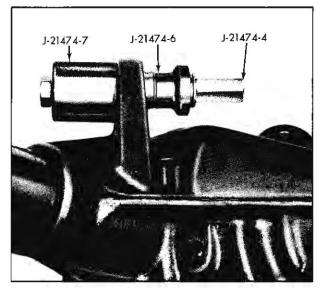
Removing Rear Upper Control Arm Rear Bushing
